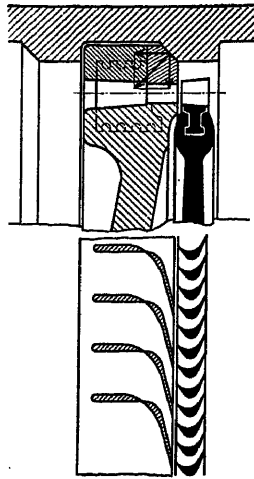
B.B.C.*, diaphragm with nozzles machined all over
